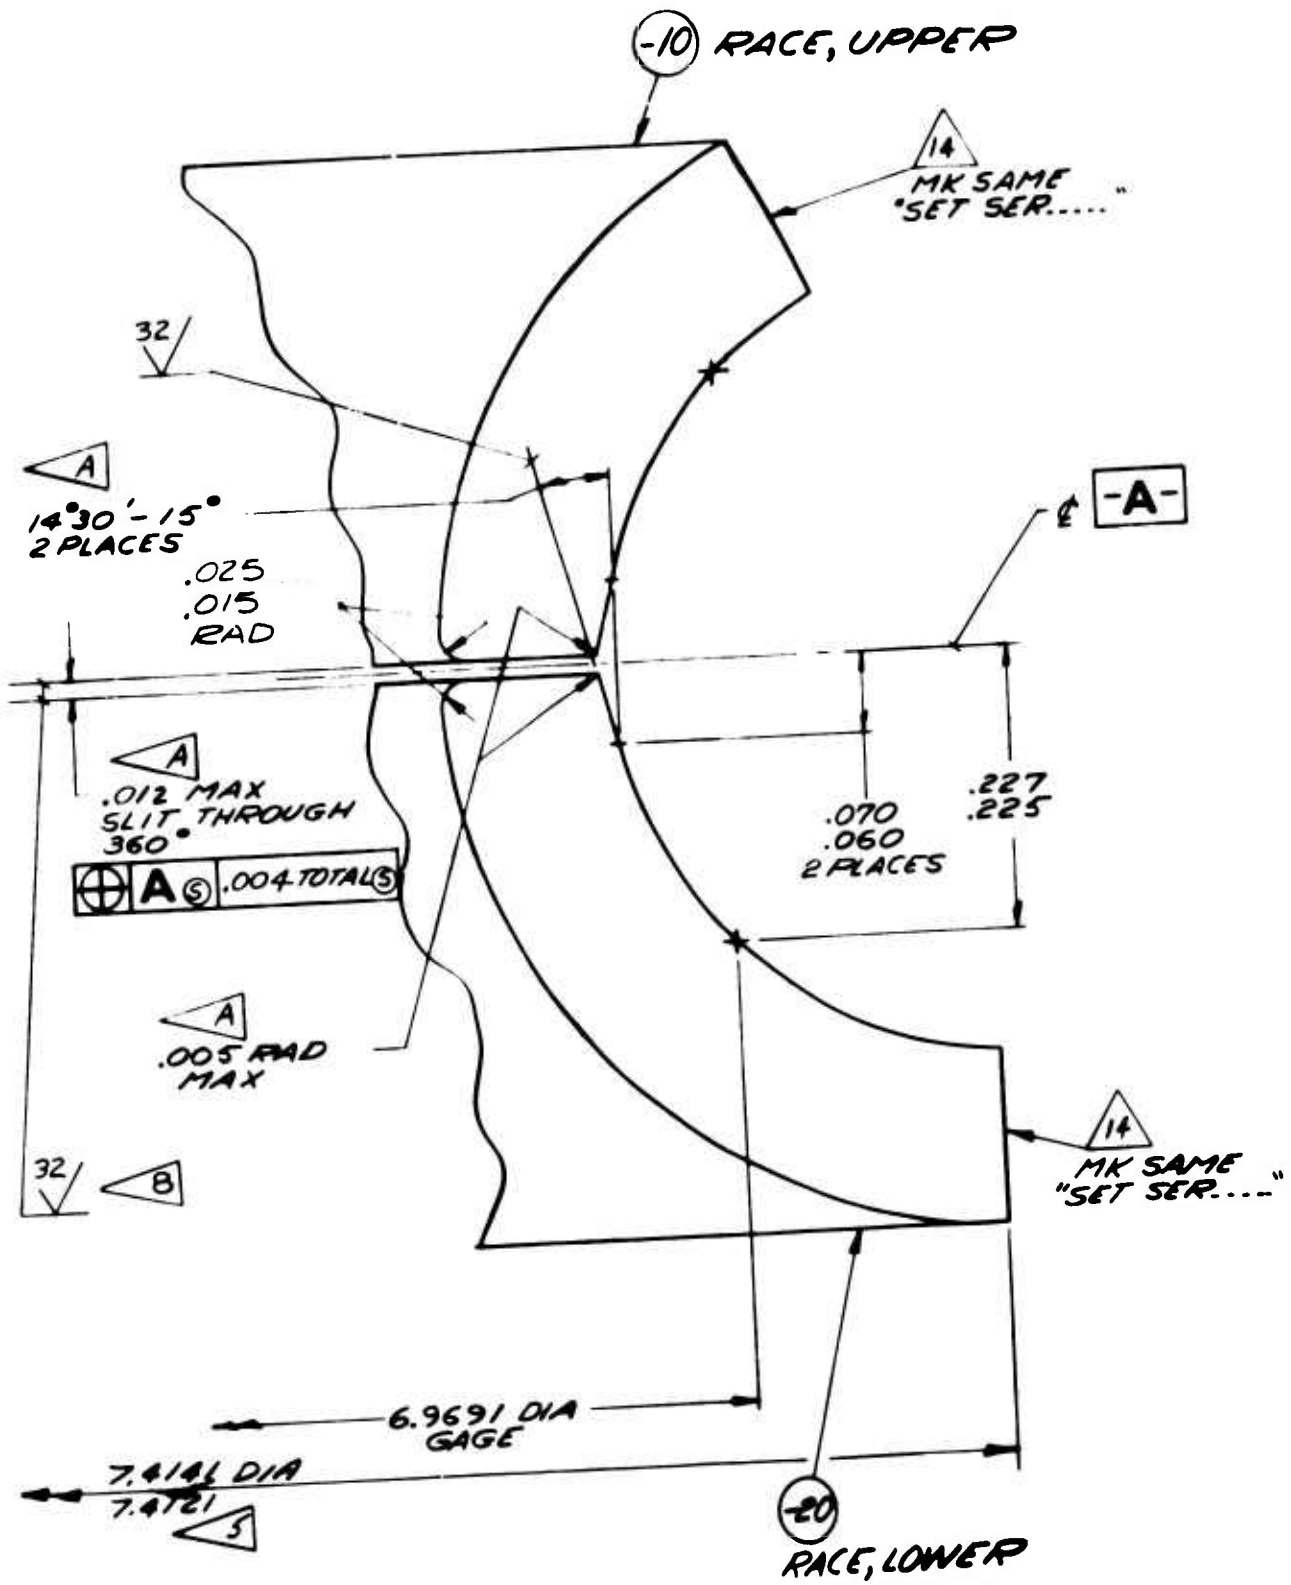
INNER-RACE INSERT REWORK DRAWING
